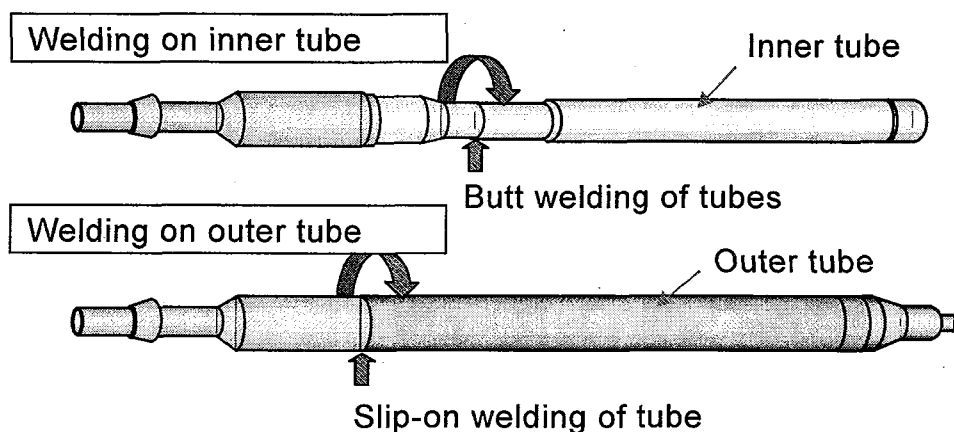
Welding method of inner and outer tubes by remote handling.
